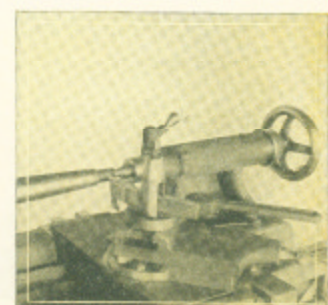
Cutting Thread on the End of a Long Steel Shaft.
